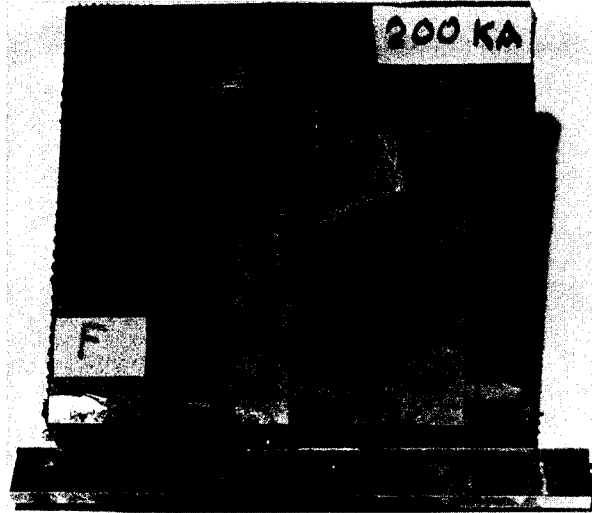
B/E sandwich panel with 1" wide aluminum strips, spaced 2" apart, with the aluminum strips removed after a 200KA lightning strike
